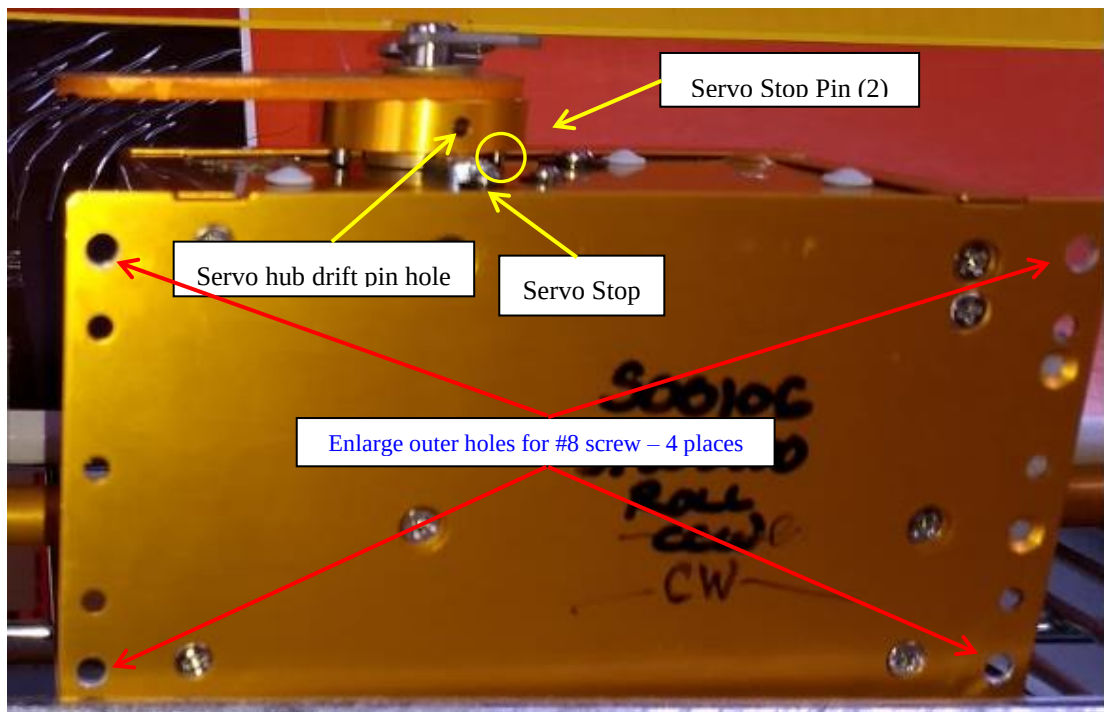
ROLL SERVO HUB DRIFT PIN & LOCKING PIN HOLE ALIGNMENT
